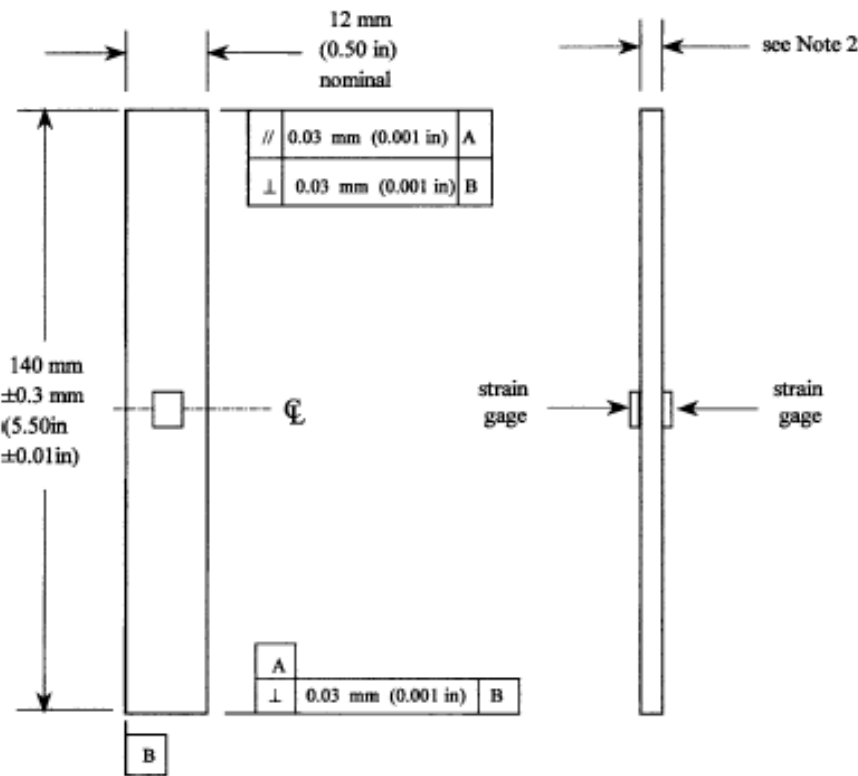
ASTM D695 Compression Test Sample Configuration for Materials less than 3.2 mm (0.125 inch) Thick<sup>13</sup>
